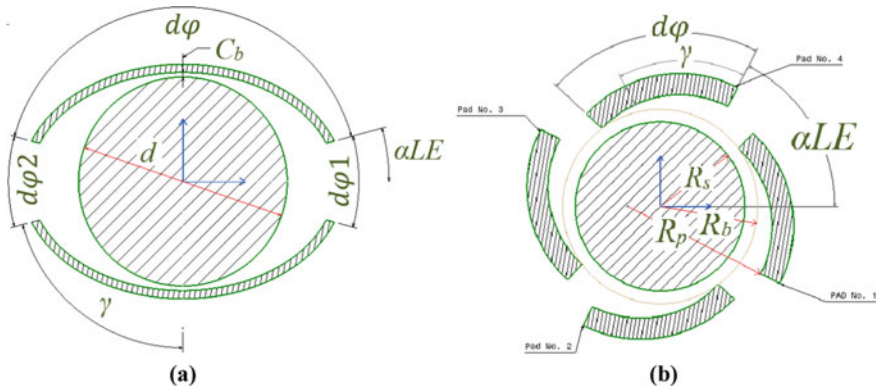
Bearing schemes: a elliptical and b tilting pad bearings
